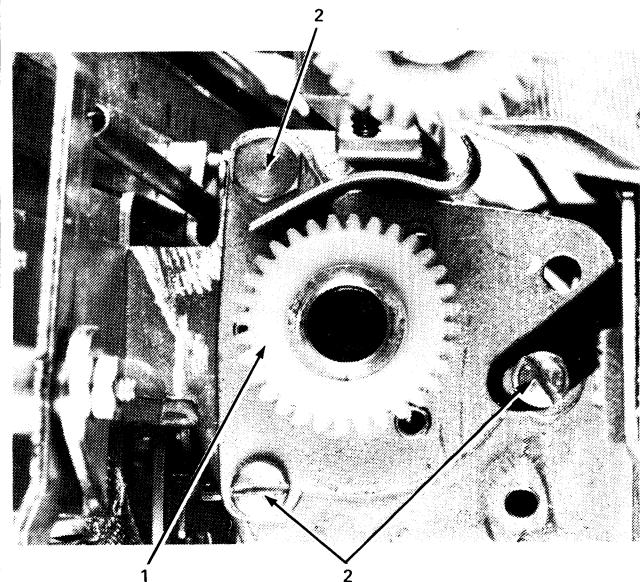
Belt Replacement (Cycle Shaft Bearing Plate Exposed)
